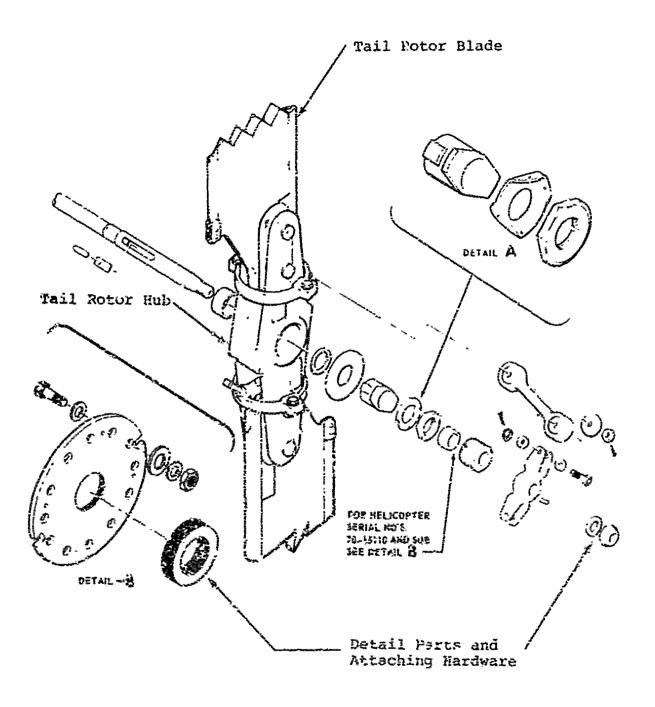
Tail Rotor Assembly, OH-58 Helicopter.
